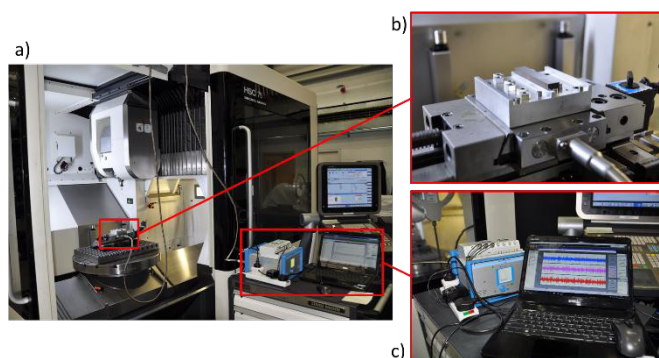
Experimental setup, (a): complete machine setup; (b): work piece with its holder and dynamometer; (c): Cutting force data processing equipment.
